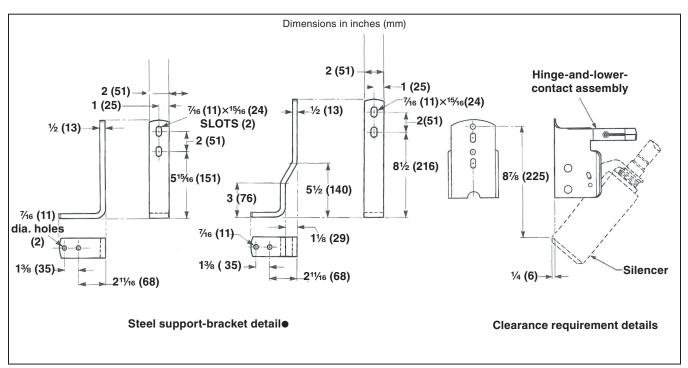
Dimensions for mounting live parts for SM-20 Power Fuses.
